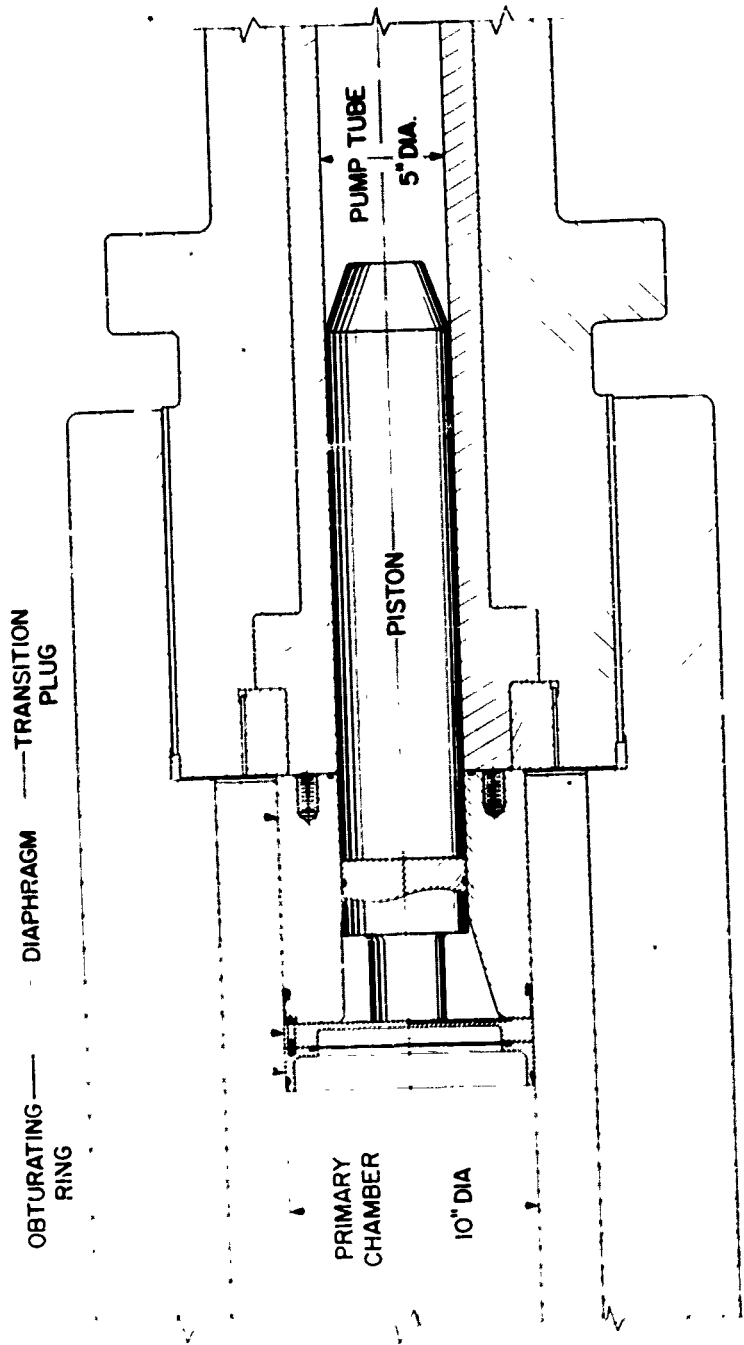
PRIMARY CHAMBER - PUMP TUBE ASSEMBLY
